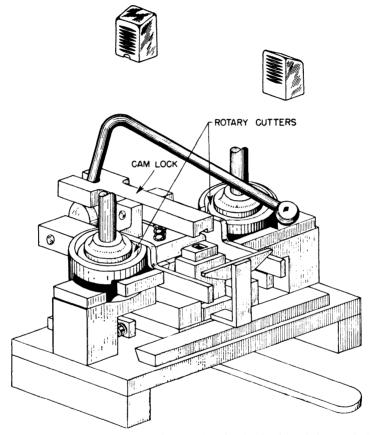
Special tool for slotting the opening in the back and front of the diecast part shown in the top drawing.
